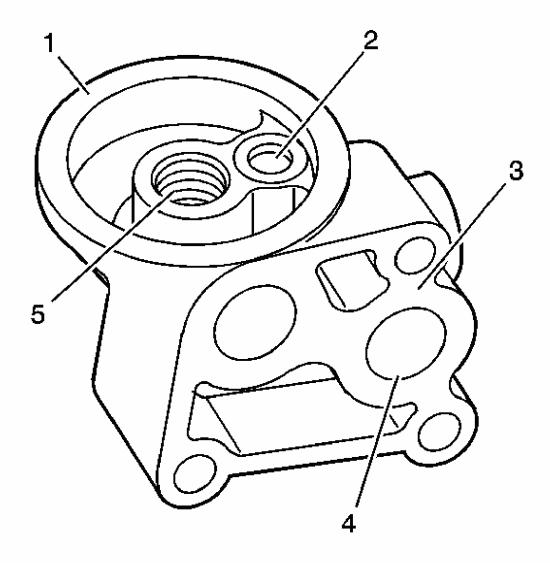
View Of Additional Inspection Areas Of Oil Filter Adapter (without Oil Cooler)
